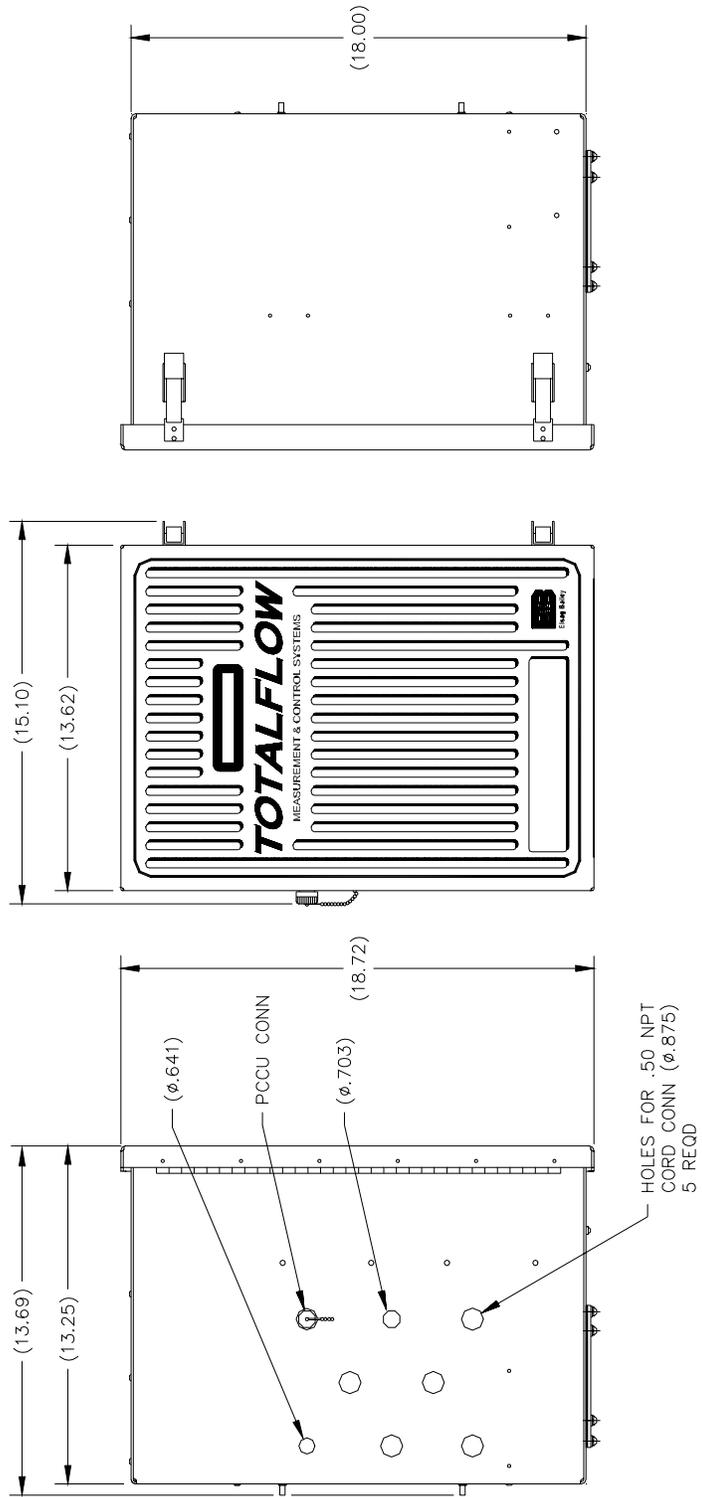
1 Side & Front Dimension Drawing, Model 6790 RTU
